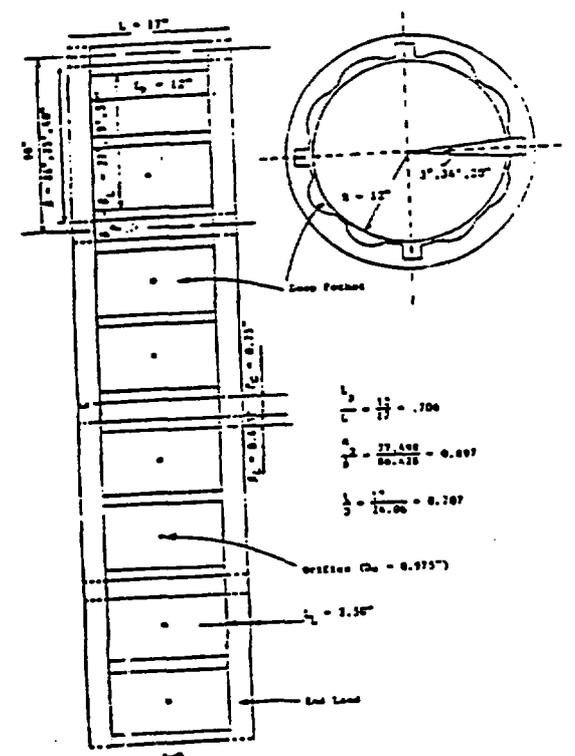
Four - Pad, Deep - Pocket, Hydrostatic Bearing With Two Pockets Per Pad
